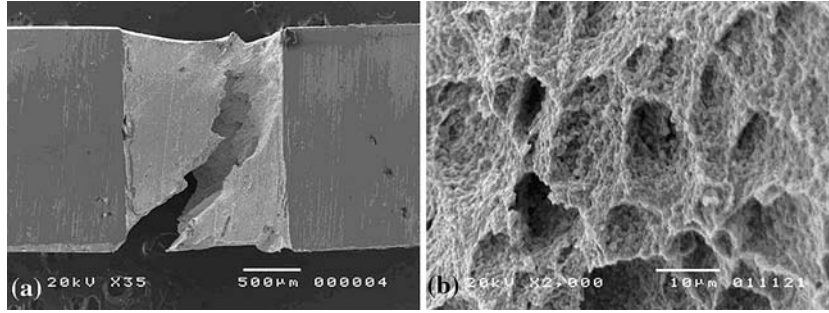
Failure path of as-soldered Sn-37Pb/Ni-P solder joint. (a) Cross-sectional view of the entire fracture joint. Higher degree of necking in the bulk solder indicates that the solder is more ductile than Sn-3.5Ag. (b) Dimples observed from the fractured surface.
